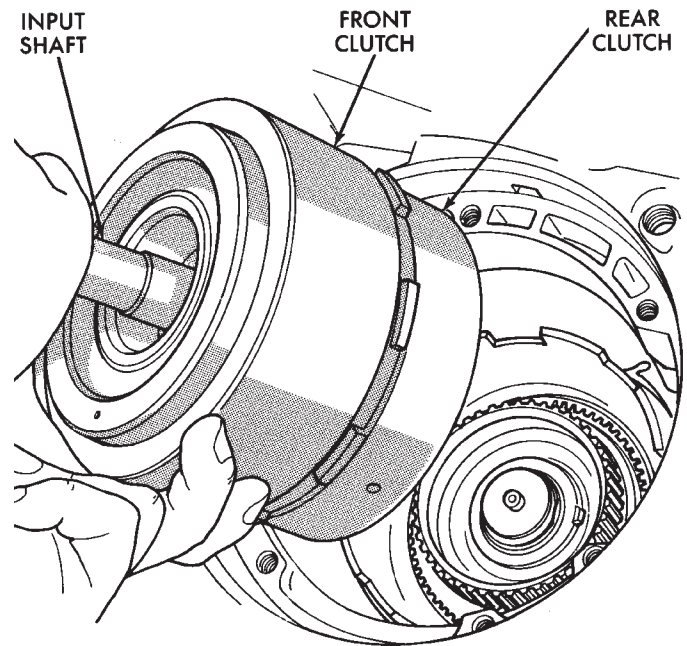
Aligning Rear Clutch Disc Lugs (42RH)
